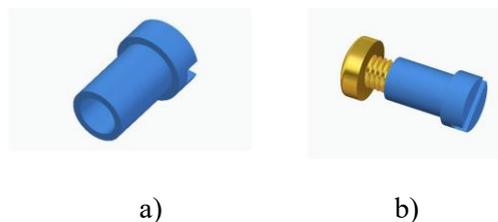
The CAD model of the bolted joint; a) Sideway view; a) Bolted joint assembly;
